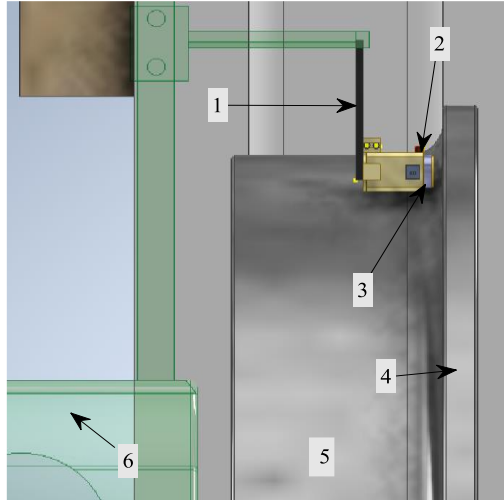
Magnified view on the fixed position of the sensor support structure, (1) Sensor holding fixture, (2) Thermocouple sensor, (3) Inductive sensor, (4) Wheel flange, (5) Wheel tread, (6) Bogie frame
